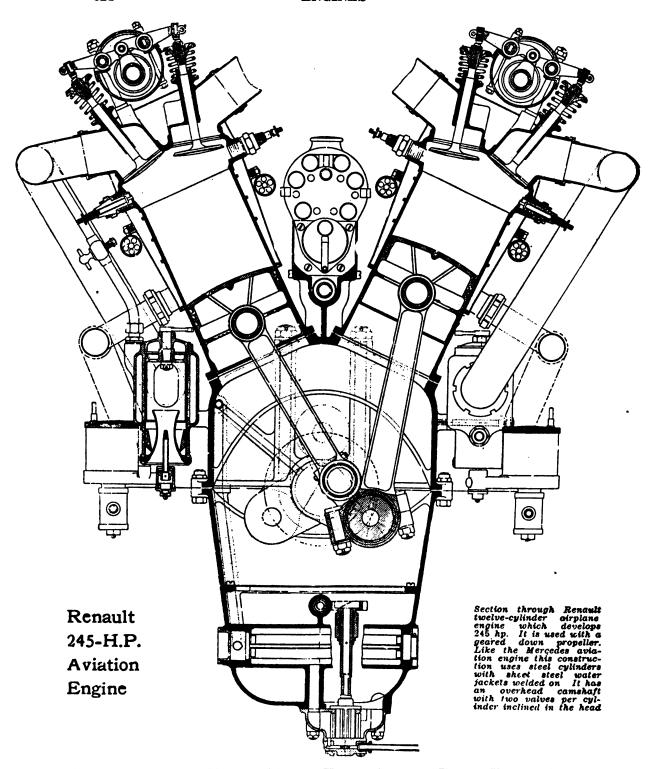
Sectional View of Modern V-type Airplane Engine Used in France
